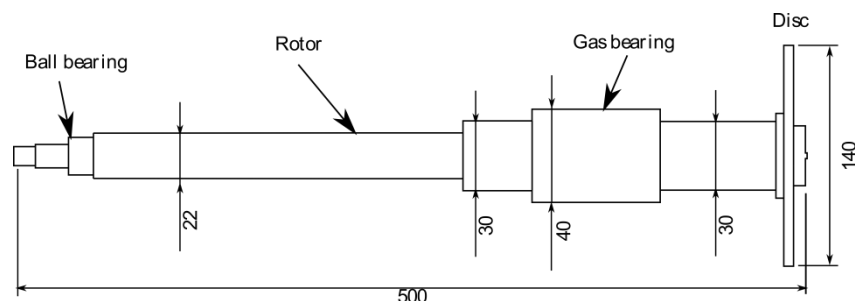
Schematic view of the mechanical system and principal dimensions in mm.
